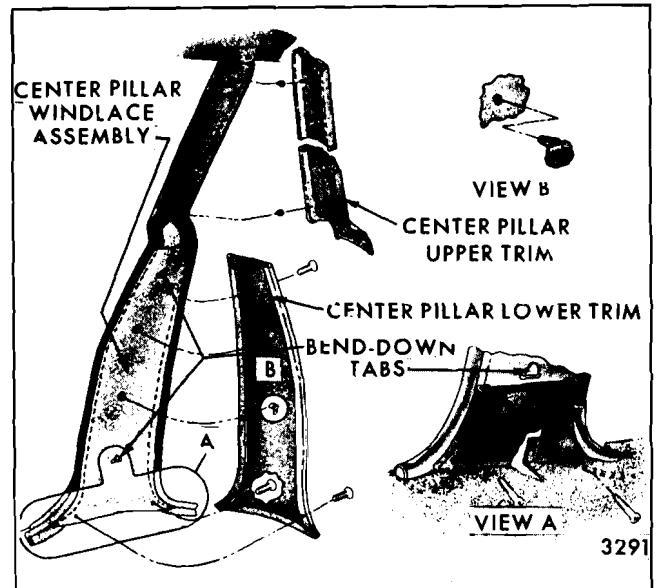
Center Pillar Trim - "A-B-C and X" Four Door Closed Styles.
